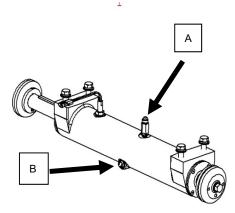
Single Speed Blade Shaft Assembly A – Casing vent line B – Oil drain plug
